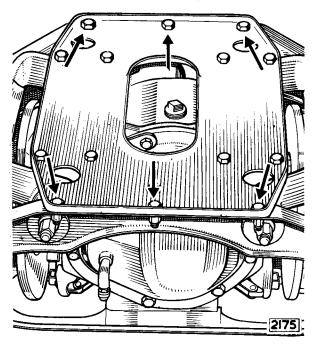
Showing the six bolts which secure the tie plate to the crossbeam
